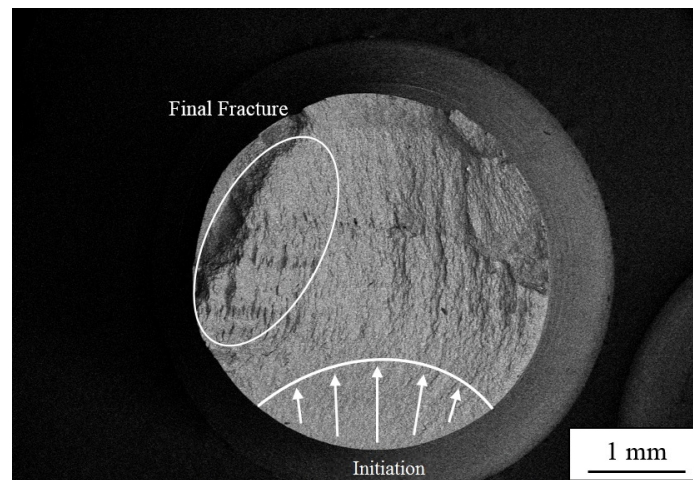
Low magnification image of fracture surface for the 150 MPa stress amplitude specimen.
